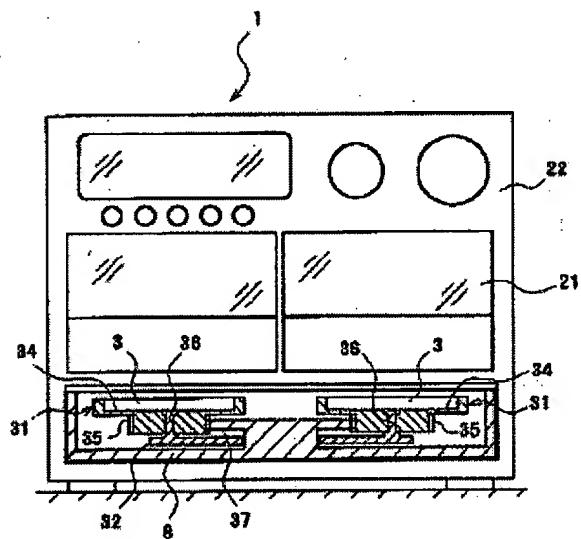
Cross-sectional view of the main parts of audio device 1 using turntable apparatus 30 disclosed in the present invention.
